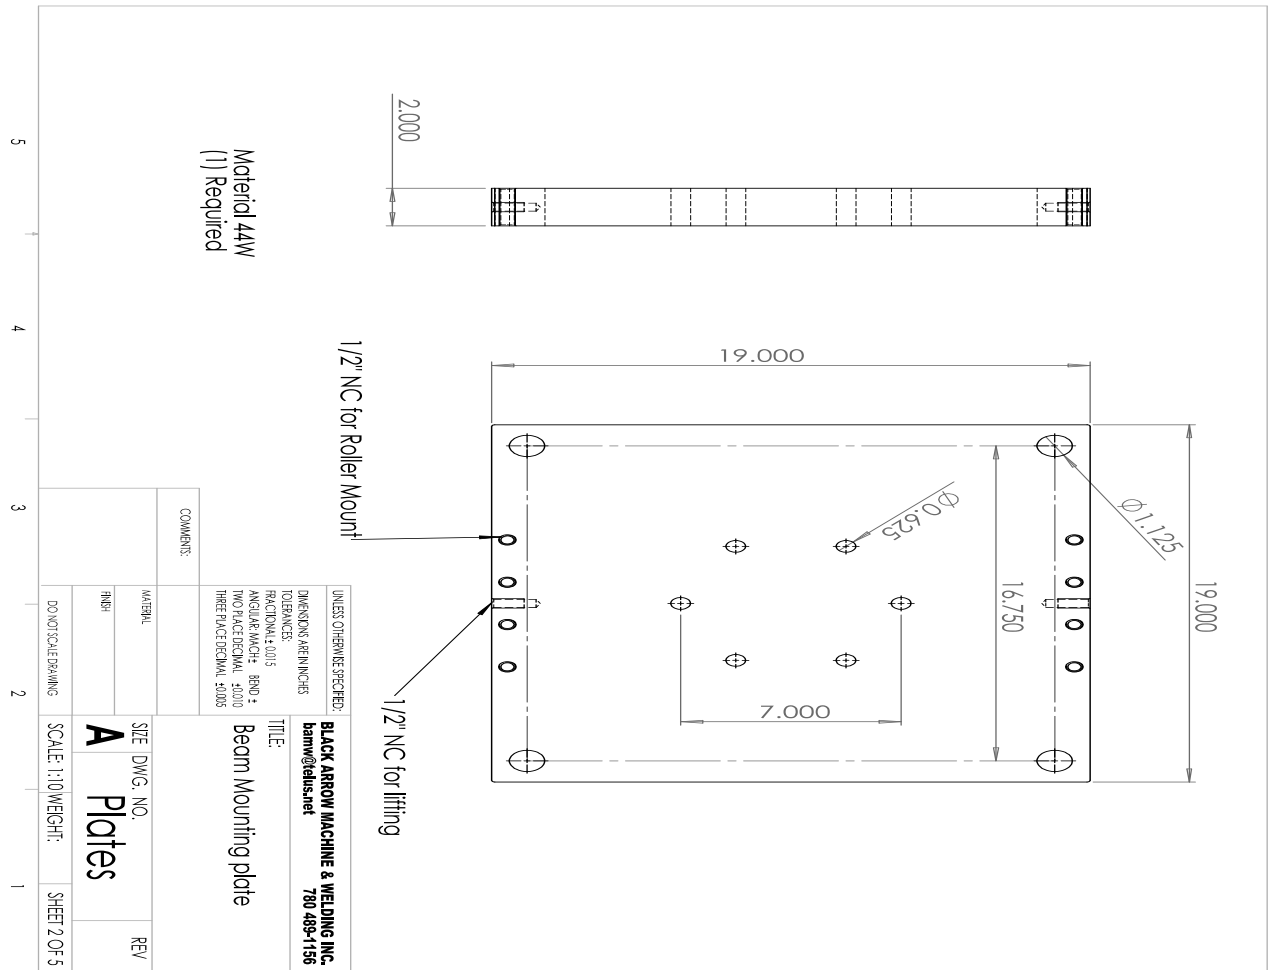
Detailed Drawing of the Beam Mounting Plate
